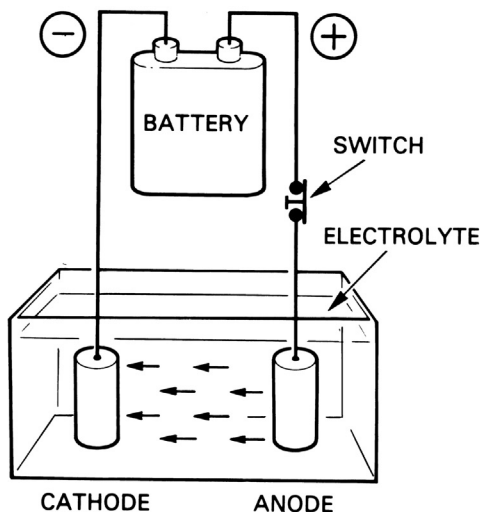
Electro-chemical machining. (Source: Rolls Royce.)
